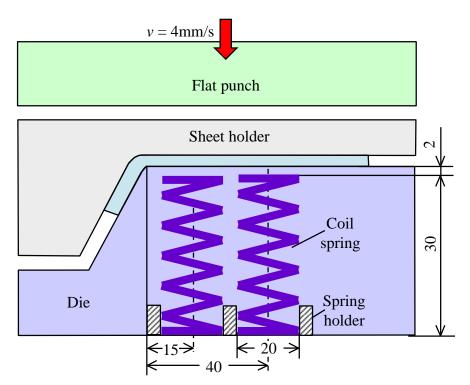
Conditions of trimming L-shaped JSC1180YN steel sheet with coil springs for c = 10% and v = 4 mm/s.
